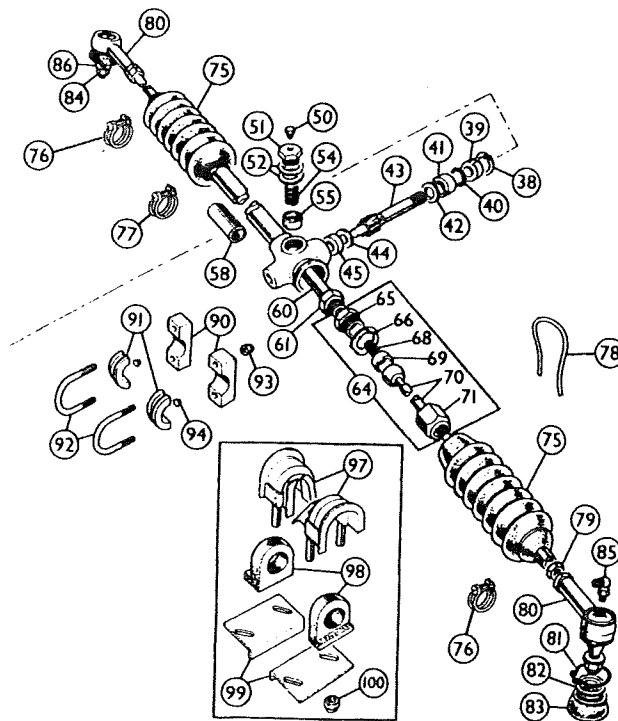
Exploded View Of TR4/4A Steering Rack
